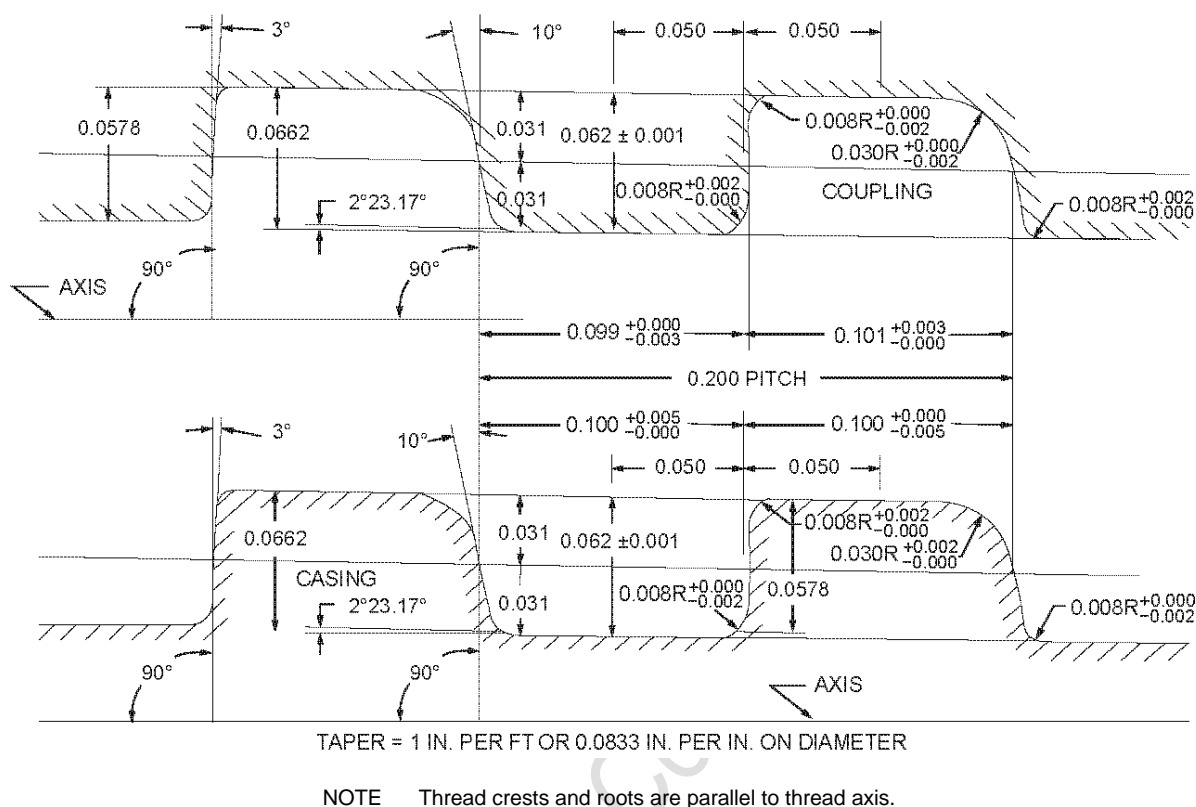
Buttress Casing Thread Form and Dimensions (Casing sizes 16 in. and larger)
